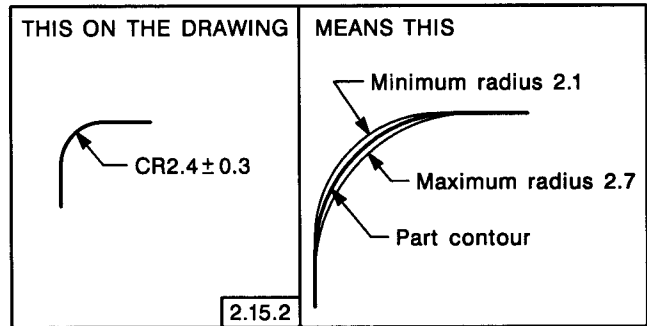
SPECIFYING A CONTROLLED RADIUS
